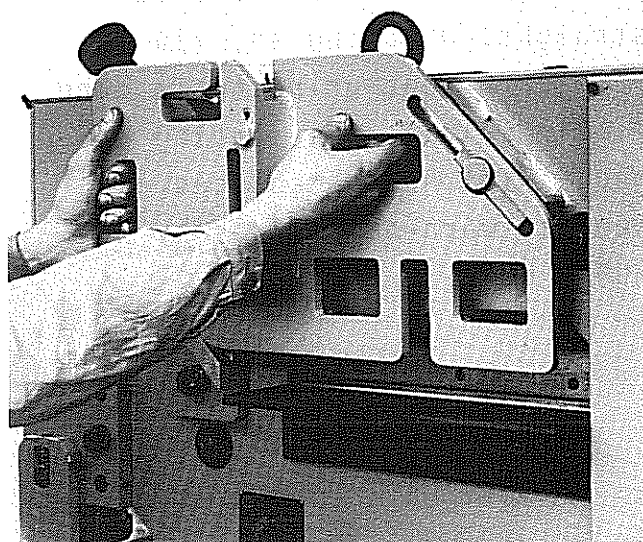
Dismounting the hold-down (HPSN 350 and HPSN 500)
